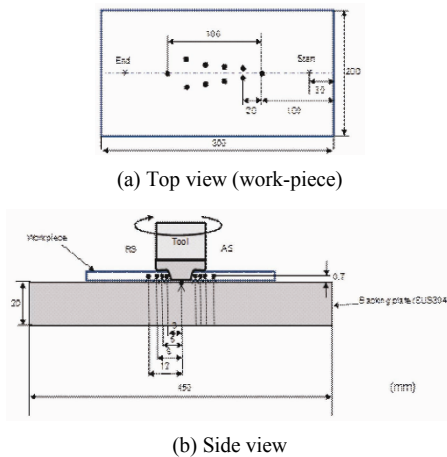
Peak temperature measurement points on the workpiece during FSW.
